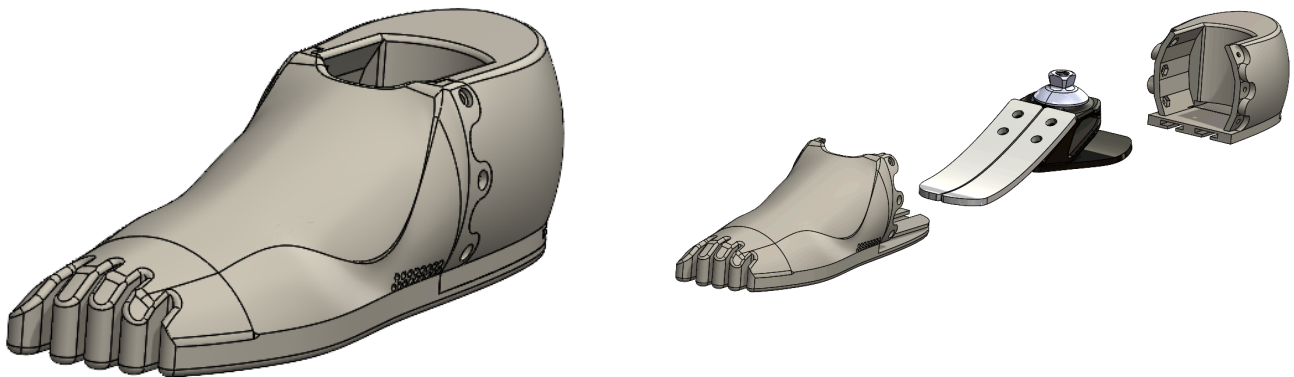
Footshell CAD Model (Left), Footshell Exploded View with Keel (Right)
